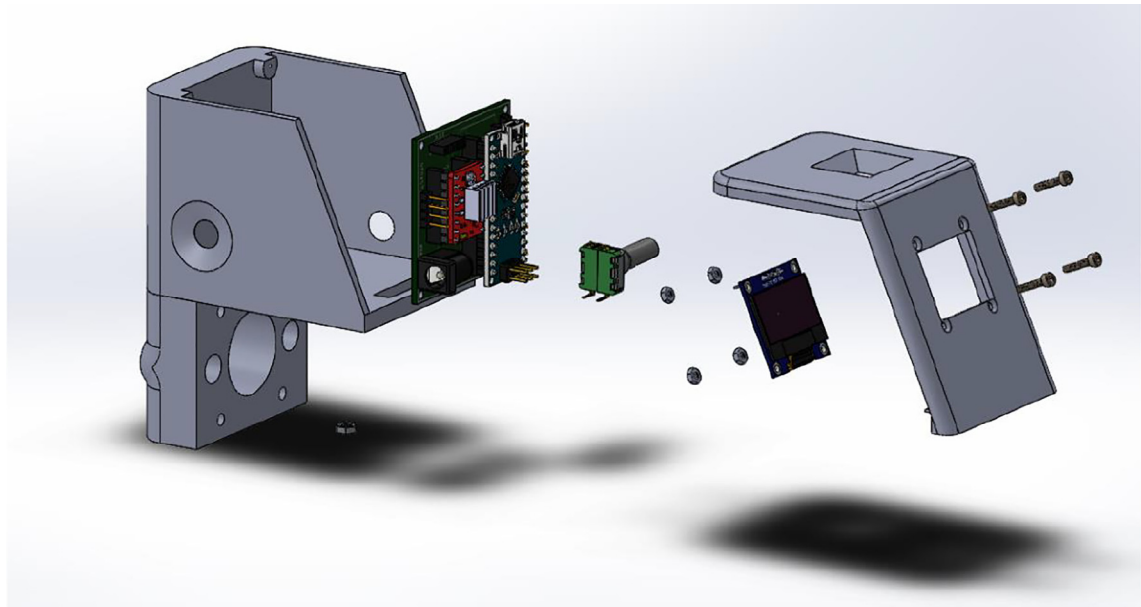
Motor Holder & Electrical cabinet and Screen Holder Assembly.
